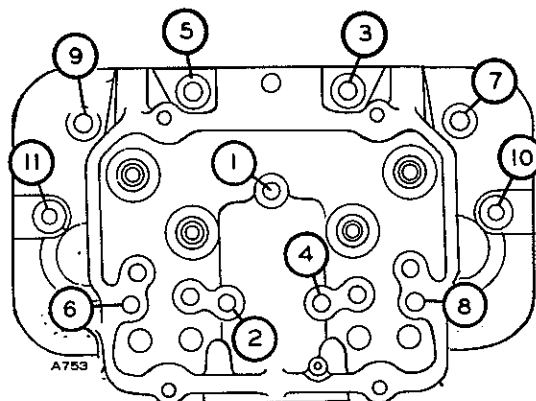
CYLINDER HEAD BOLT TORQUE SEQUENCE
